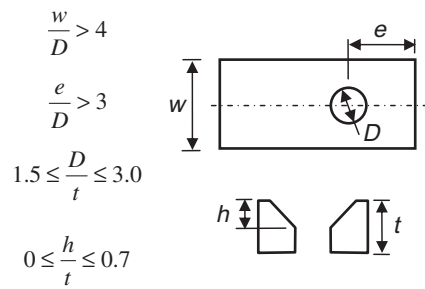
Specimen design guidelines to promote bearing failure (adapted from Ref. [10]).
